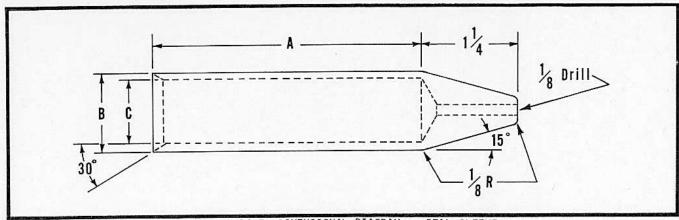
DIMENSIONAL DIAGRAM -- SEAL SLEEVE
